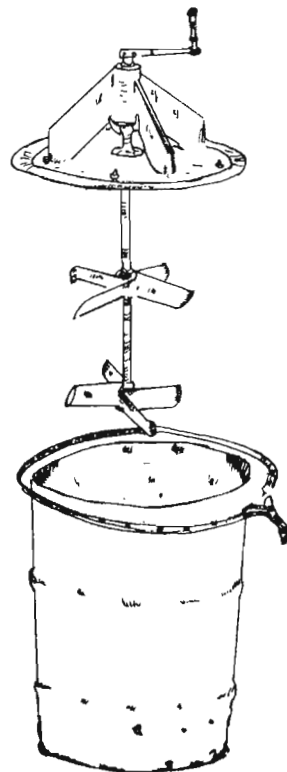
Diagrammatic Drawing Of A Mixing Drum For Insecticides
